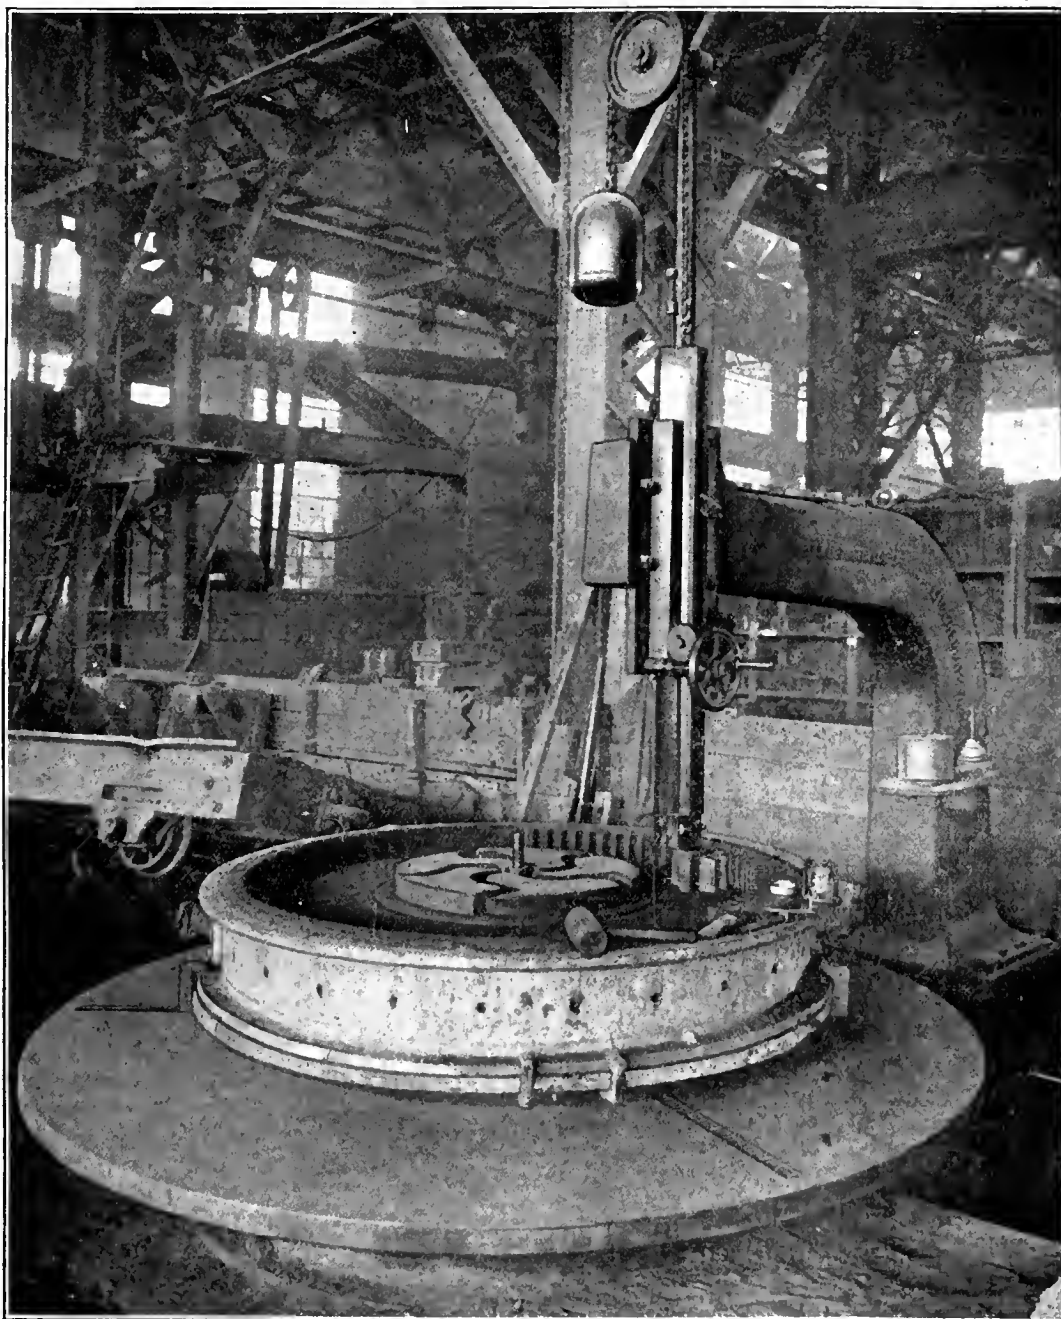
MOULDING MACHINE PRODUCING MOULD FOR LARGE GEAR WHEEL.
